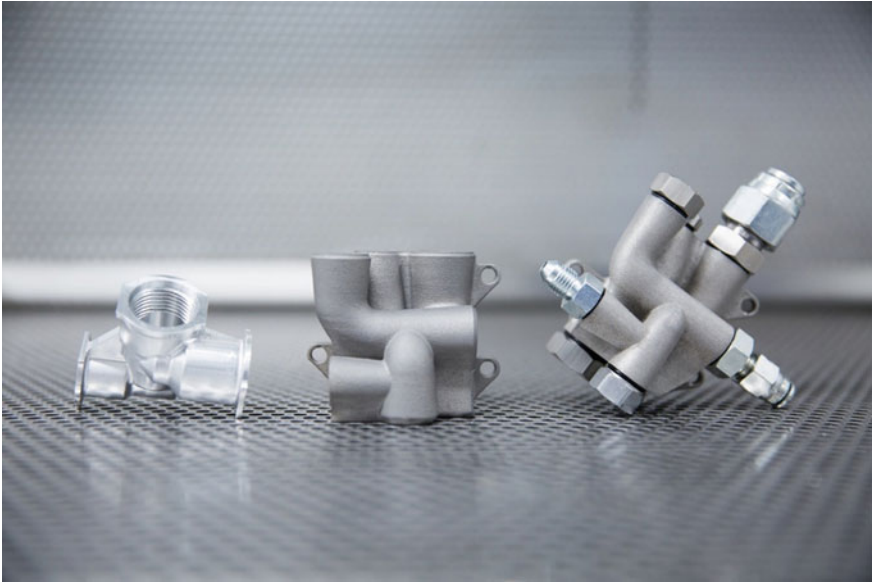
Metal 3D-printed hydraulic system parts made by Renishaw for the Land Rover BAR yacht (Courtesy of Renishaw, credit: Harry KH)
